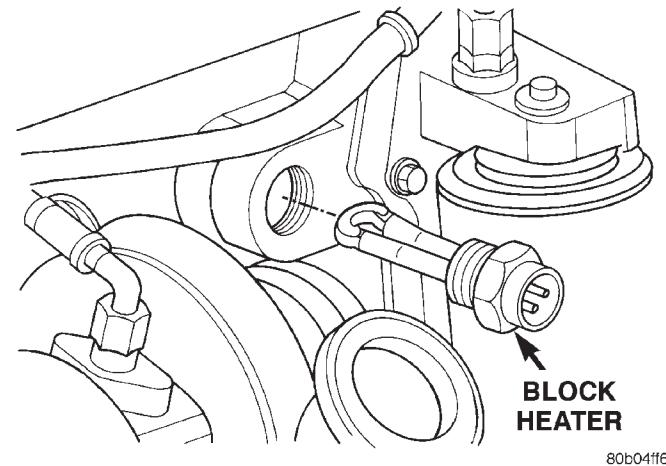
Engine Block Heater—5.9L Diesel Engine
